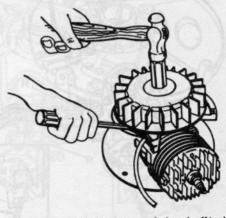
View showing use of a knock-off tool (nut) to separate flywheel from crankshaft end.
